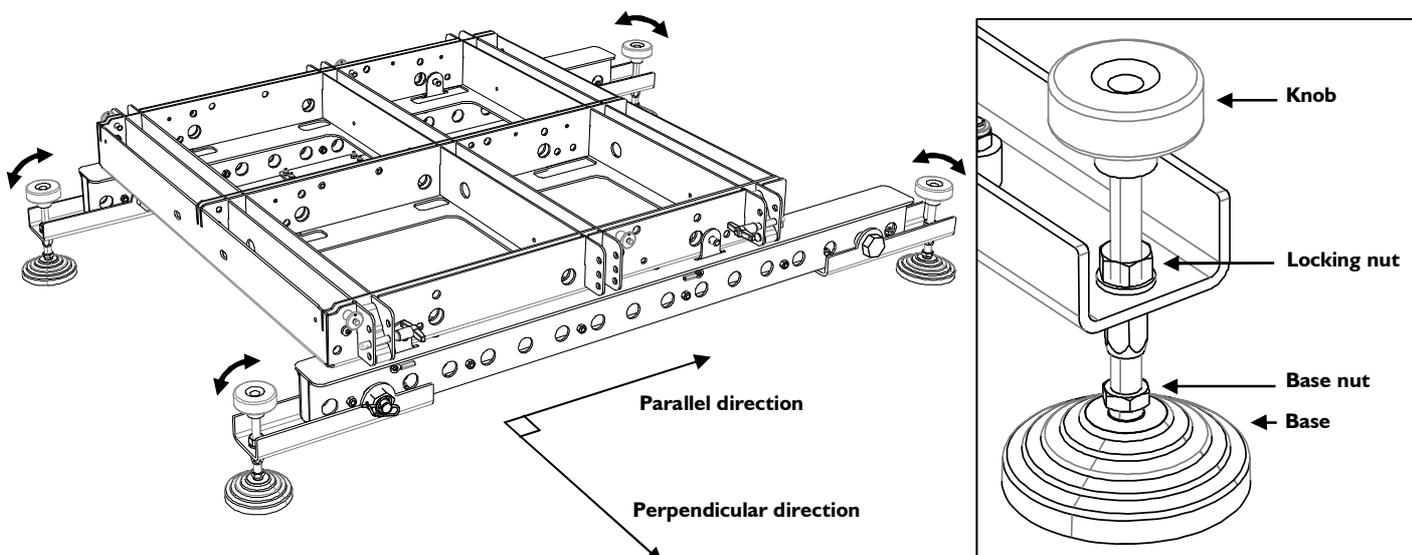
Mounting an M-BAR/M-JACK assembly
